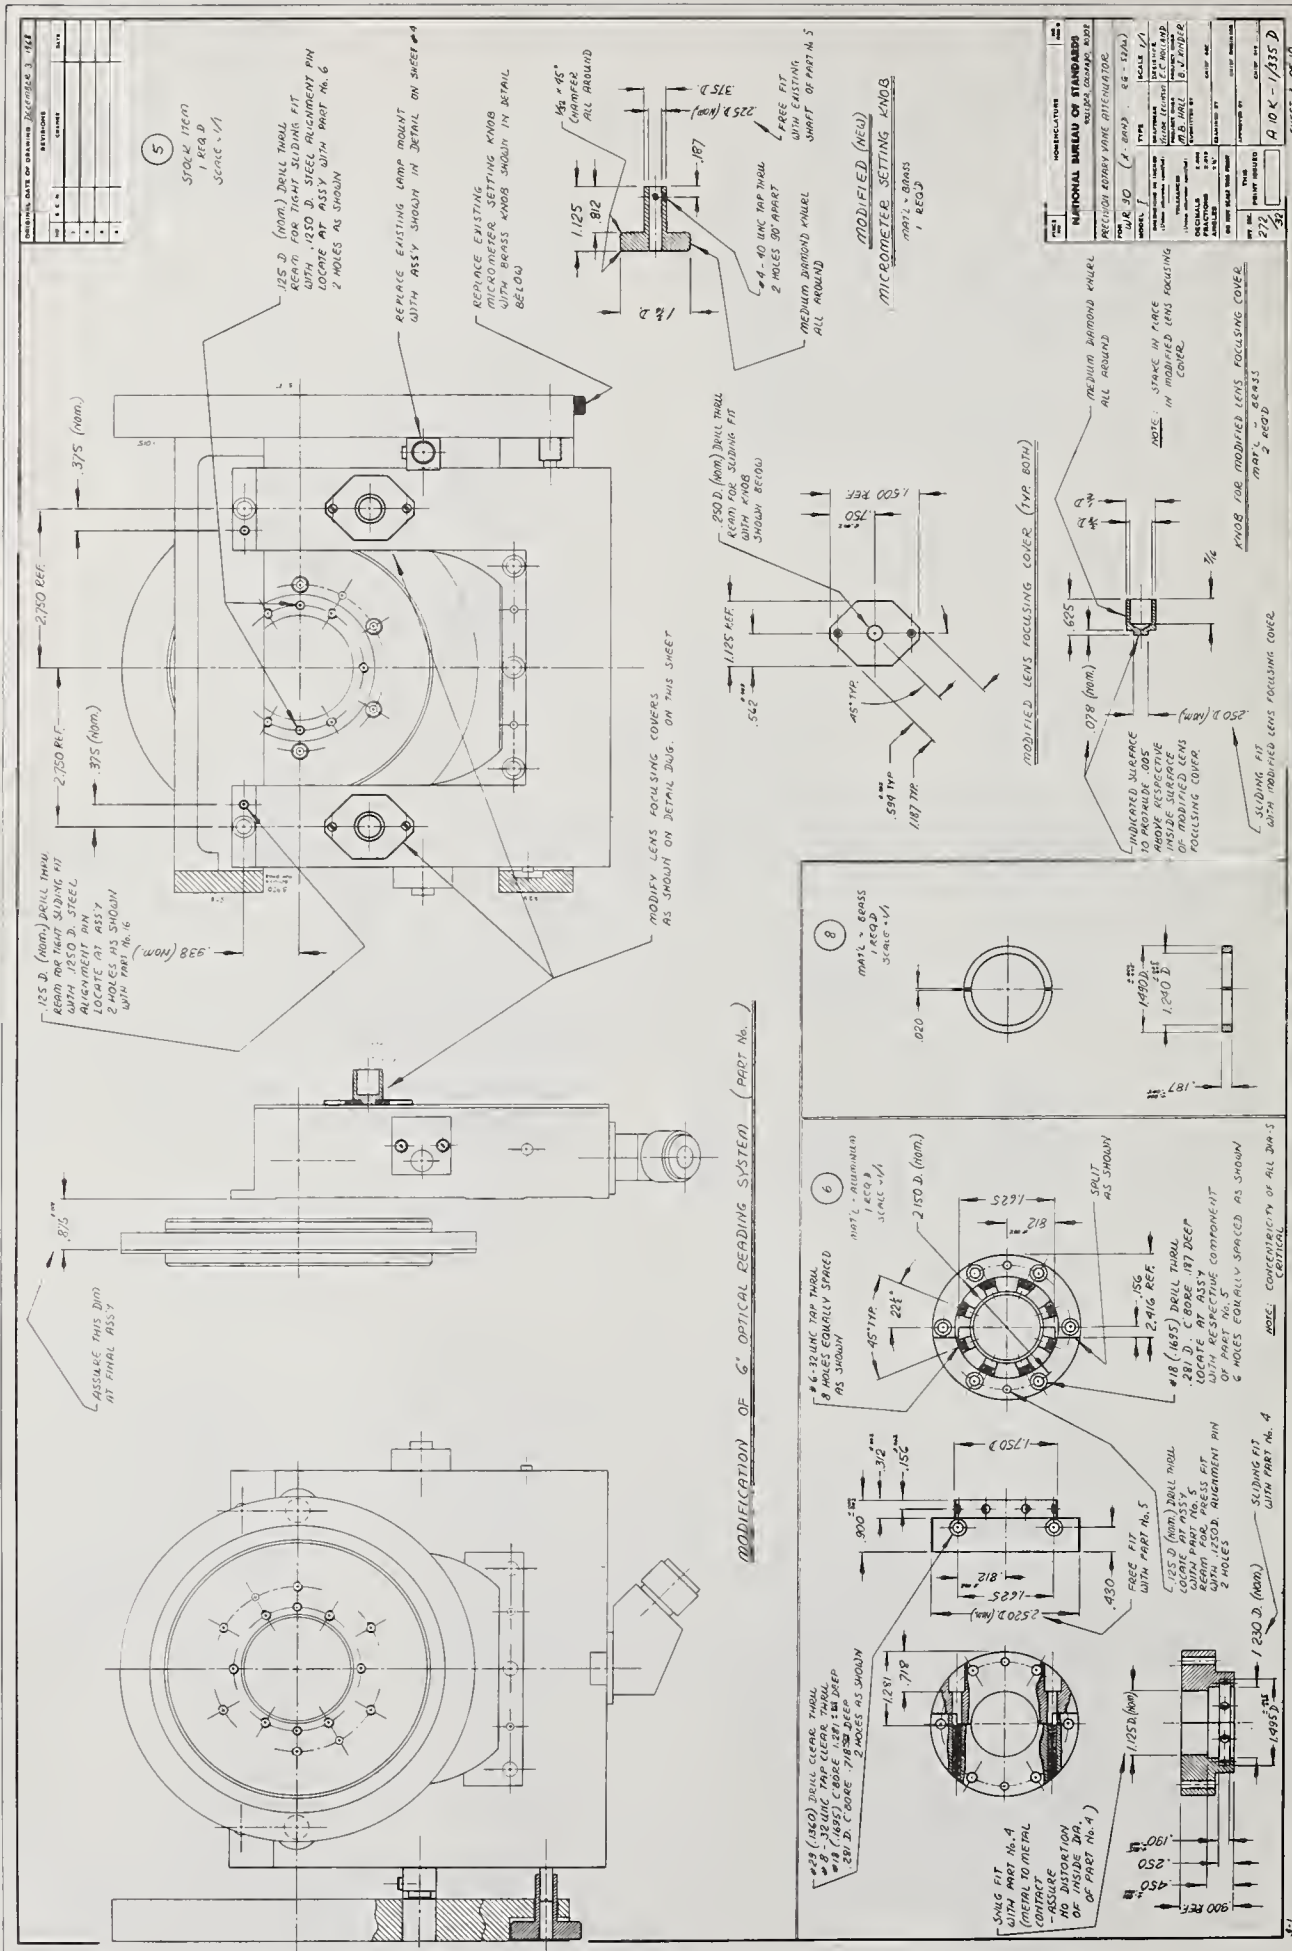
Machine drawings for optical rotary-vane attenuator.
